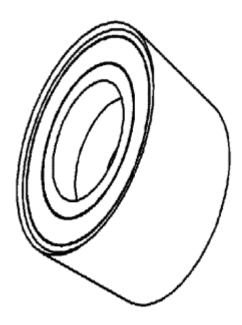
REAR CRANKSHAFT SEAL GUIDE 9509 Courtesy of CHRYSLER LLC
